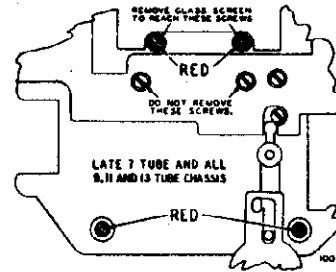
Location of 4 Red Mounting Screws in Late Models
